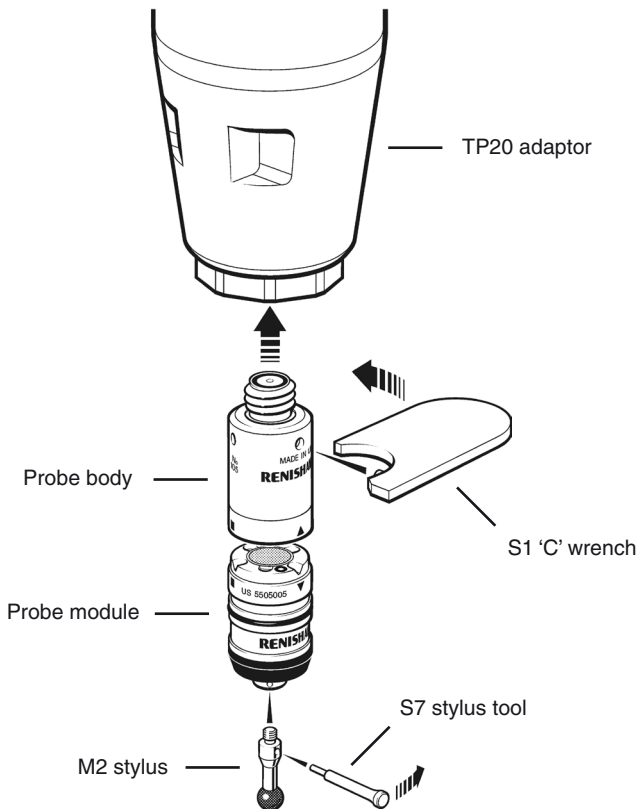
Fitting the TP20 probe onto the FARO adaptor
